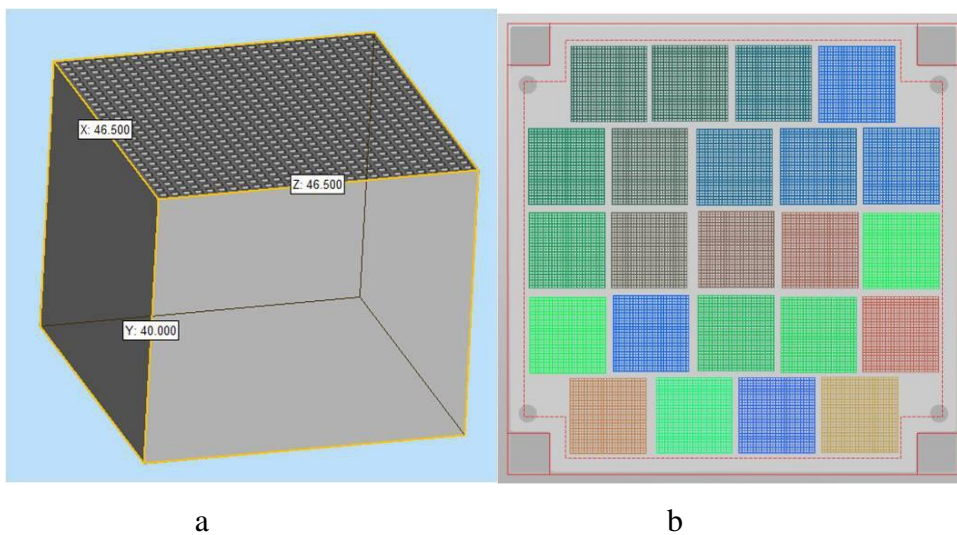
Image of detail (a) and arrangement of parts in the camera FS271M machine (b)
